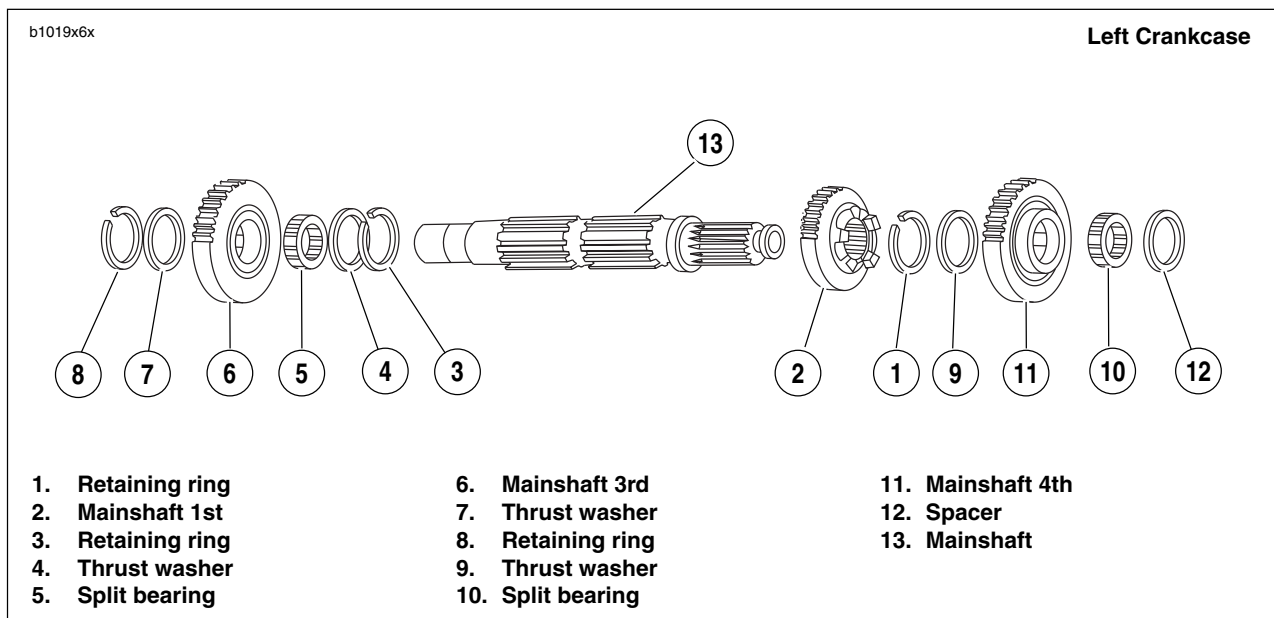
Transmission Mainshaft Assembly/Reassembly
